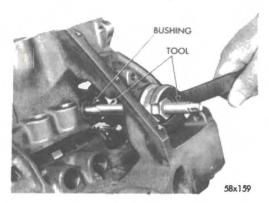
Removing Distributor Drive Shaft bushing Using Tool CA-3052
